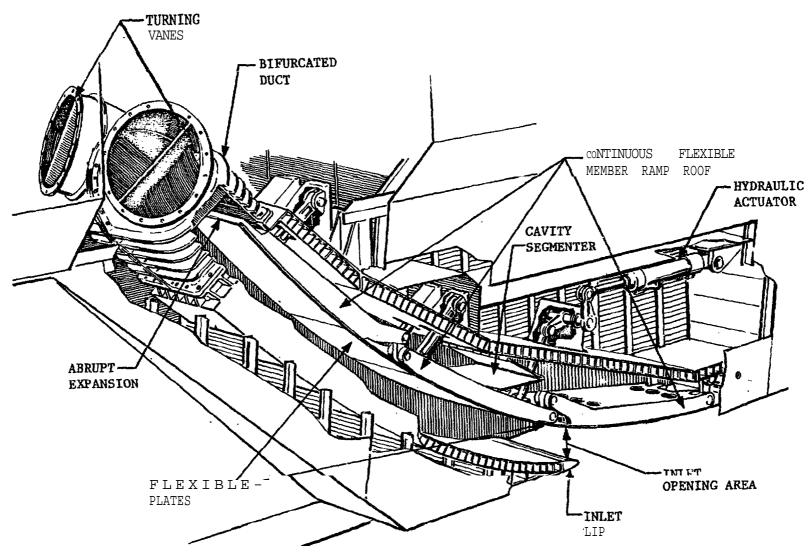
(U): Waterjet Intake Duct Ramp Roof (U)
